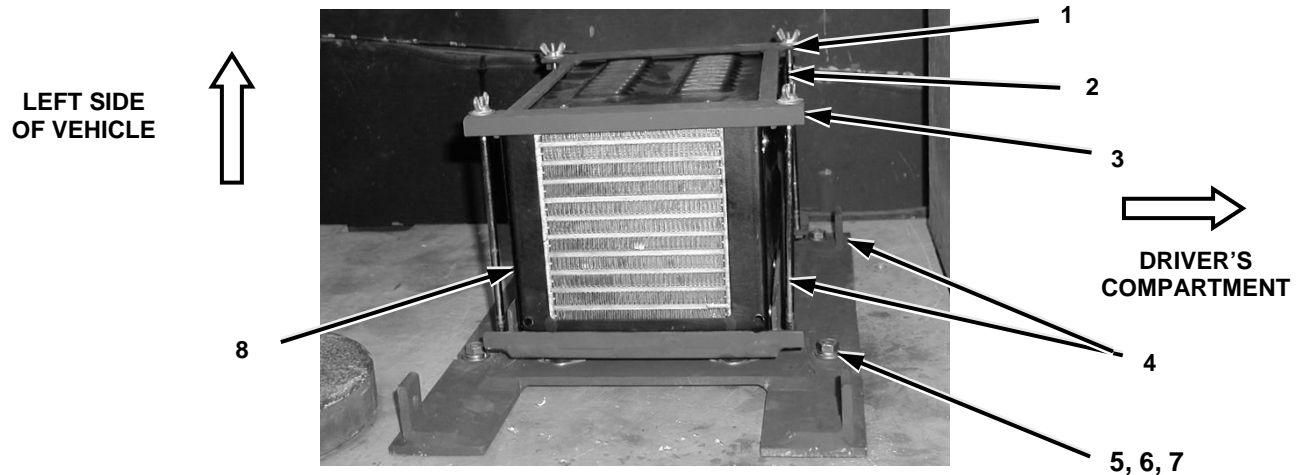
MCU Installation on Base and Support Bracket Assembly.
